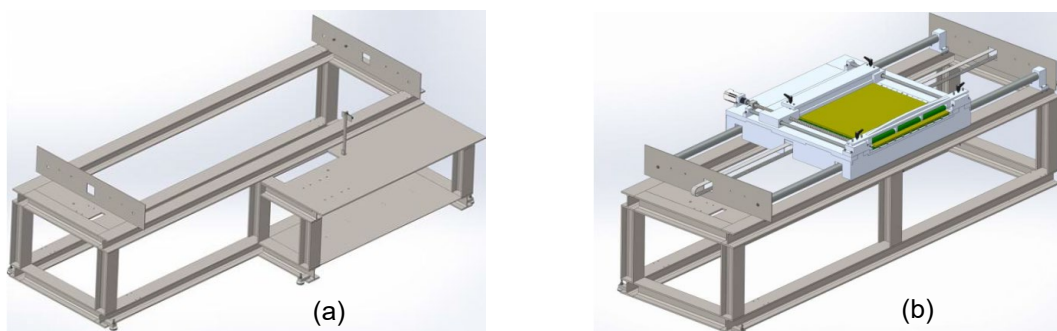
(a) Chassis of the designed machine. (b) "Clamping and motion of workpiece" system on the chassis.
